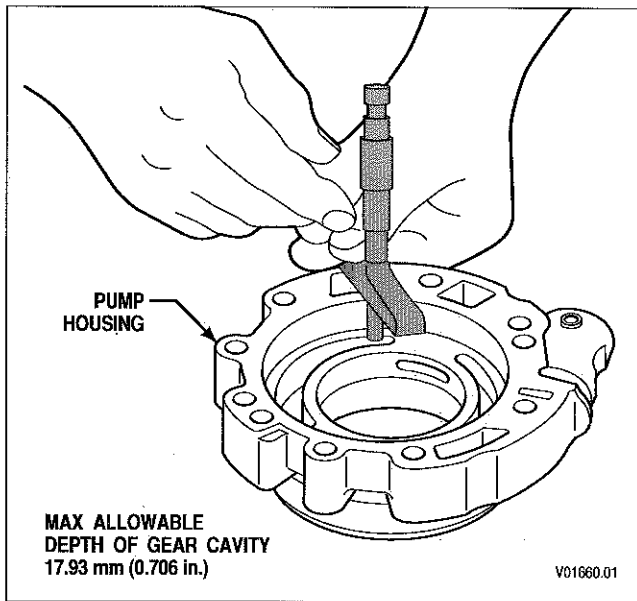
Measuring Gear-Cavity Depth In The Pump Housing
